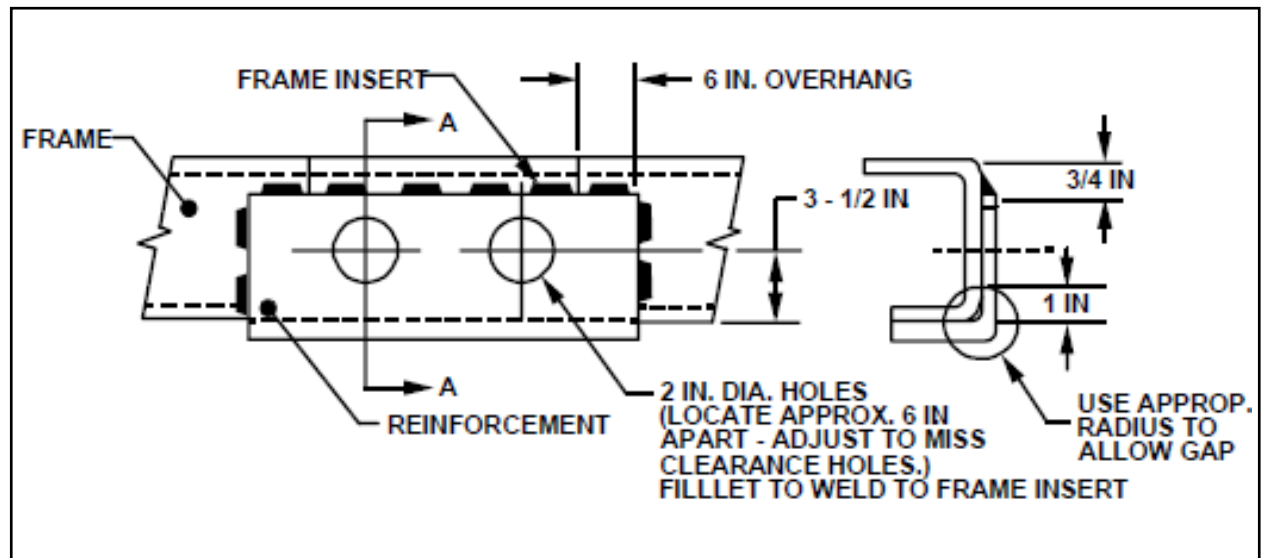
Minimum Required Method for Reinforcement and Welding
